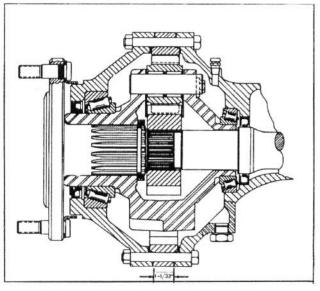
AXLE PLANETARY ASSEMBLY — NARROW RING GEAR
